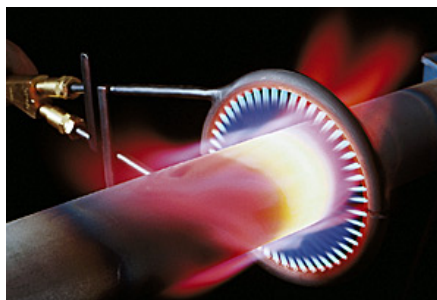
Flame hardening - Example of flame-heating equipment for tube hardening.
